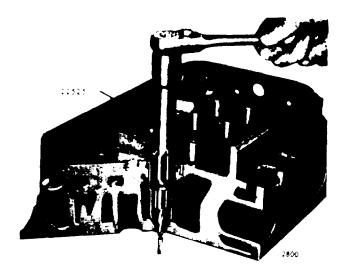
C-45. Reaming Injector Tube for Body Nut and Spray Tip
